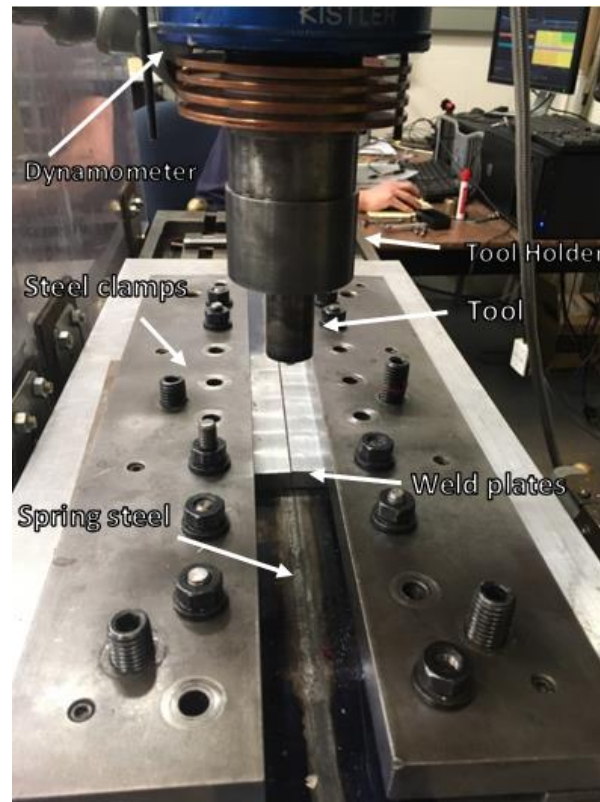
Photo of two pieces of aluminum cerium alloy placed and clamped for a friction stir butt weld
